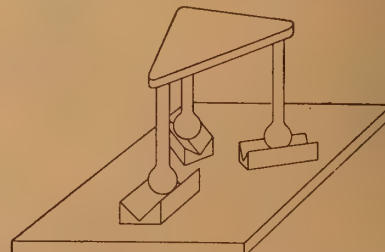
Kinematic mounting for removable part which must be precisely located. Three ball feet make two contacts each with V grooves.
